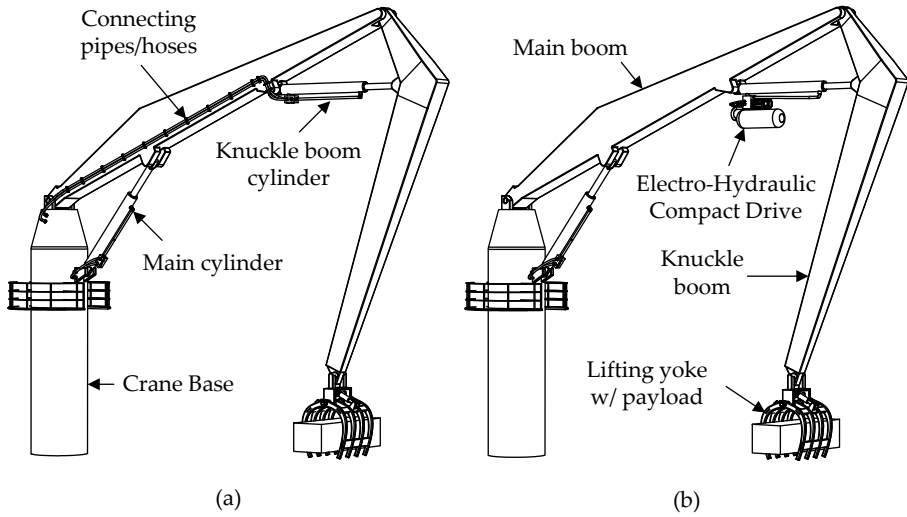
(a) Illustration of knuckle boom crane, with conventional valve-controlled cylinder drives. Hoses are transporting hydraulic power from the centralised power unit to the knuckle boom cylinder. (b) Illustration of knuckle boom crane actuated by ECDs. To shield the ECD from harsh offshore conditions, the actuator may be installed in the hollow main boom for practical realisation. From Paper B.
